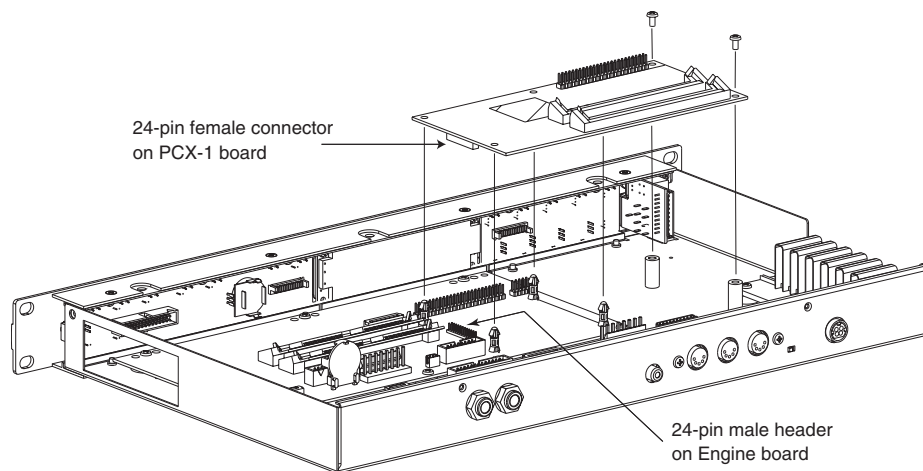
Removing the Polyphony Expansion Board (PCX-1)
